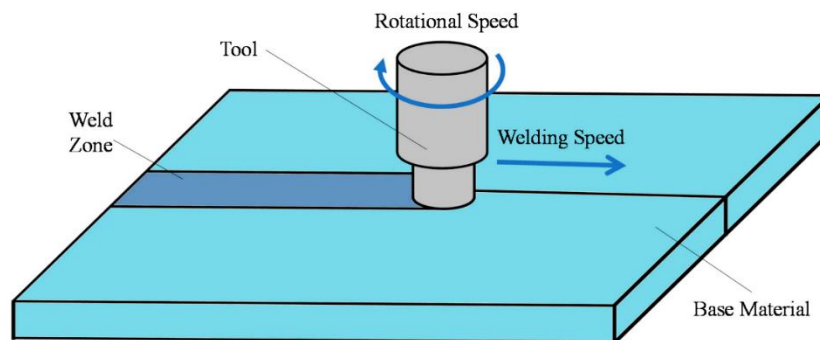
Principle of Friction Stir Welding (FSW)
